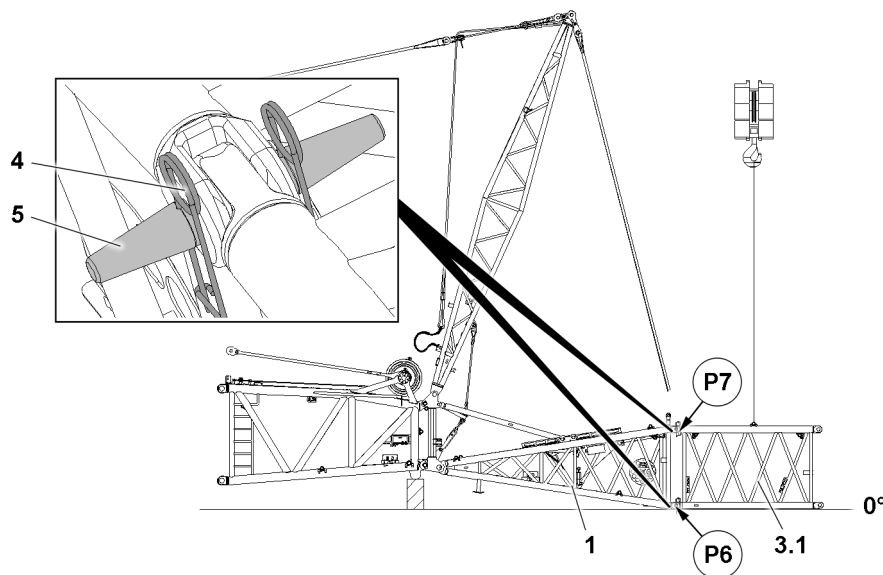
Disassembling the F-intermediate section on the F-pivot section
